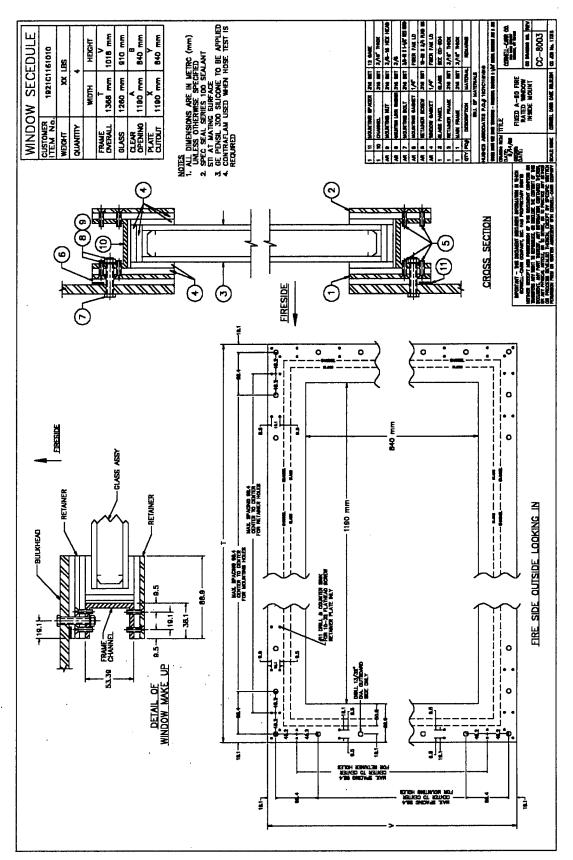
Drawings of the window assembly reproduced with permission of Cornell-Carr Company.
